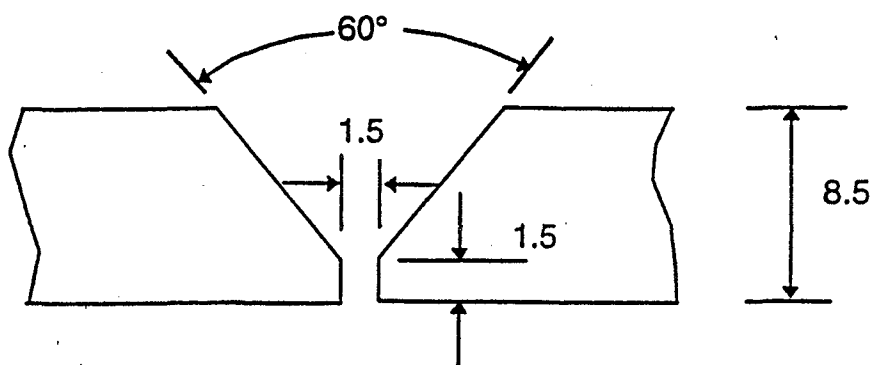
API joint preparations for pipeline welding, All dimensions in mm.
